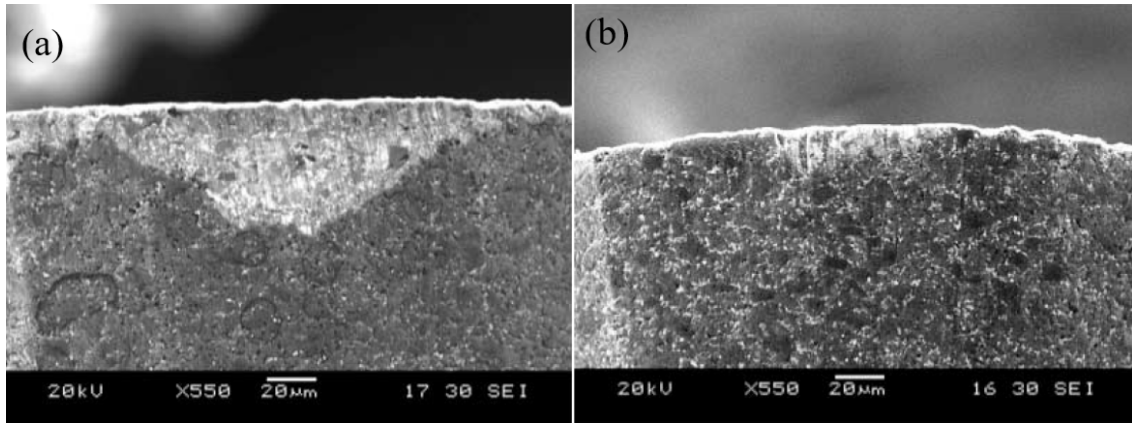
SEM photographs of worn-out tools, (a) Conventional machining; (b) Vibration assisted machining. (Zhou *et al.*, 2003)
